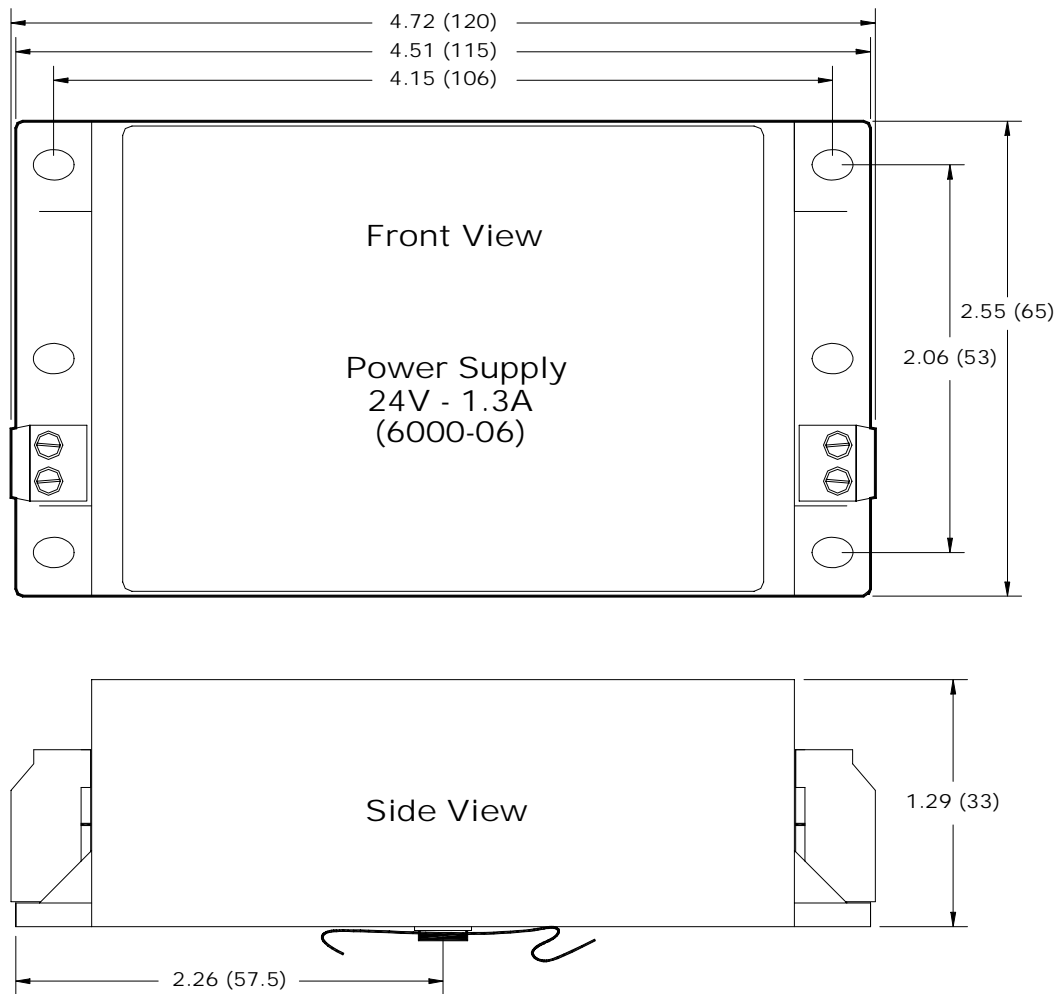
± 24 Vdc Power Supply Dimensions (6000-06)
